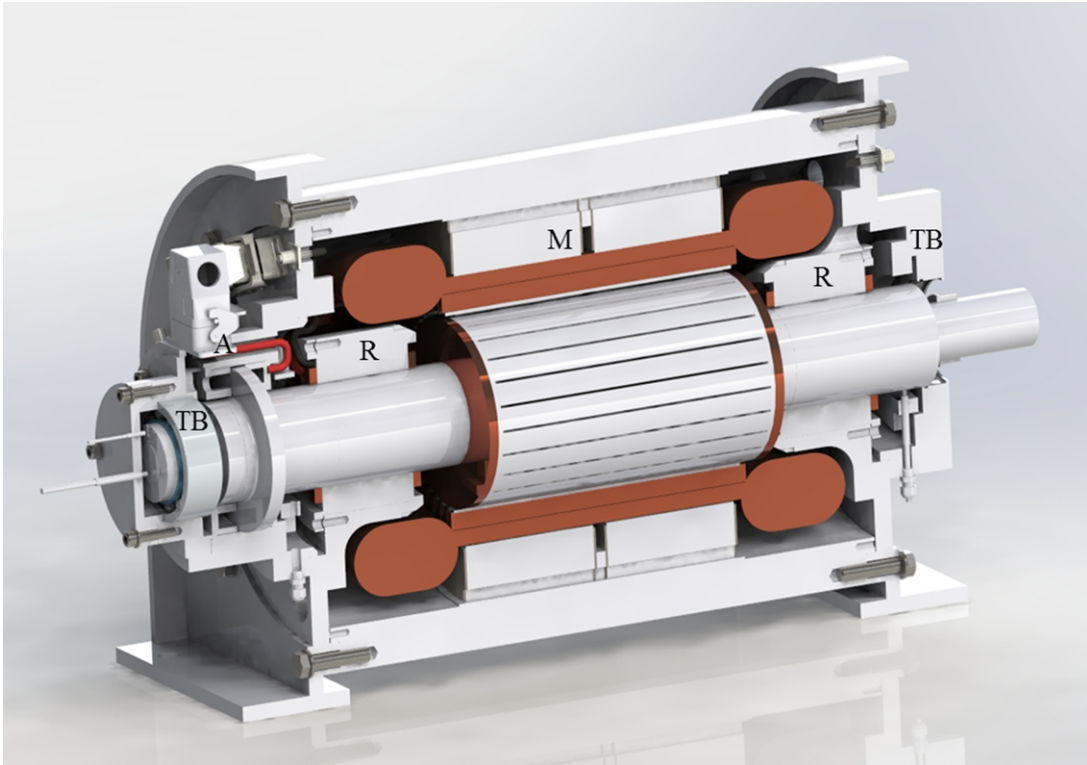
Illustration of the electric motor, touchdown bearings and rotor II.
